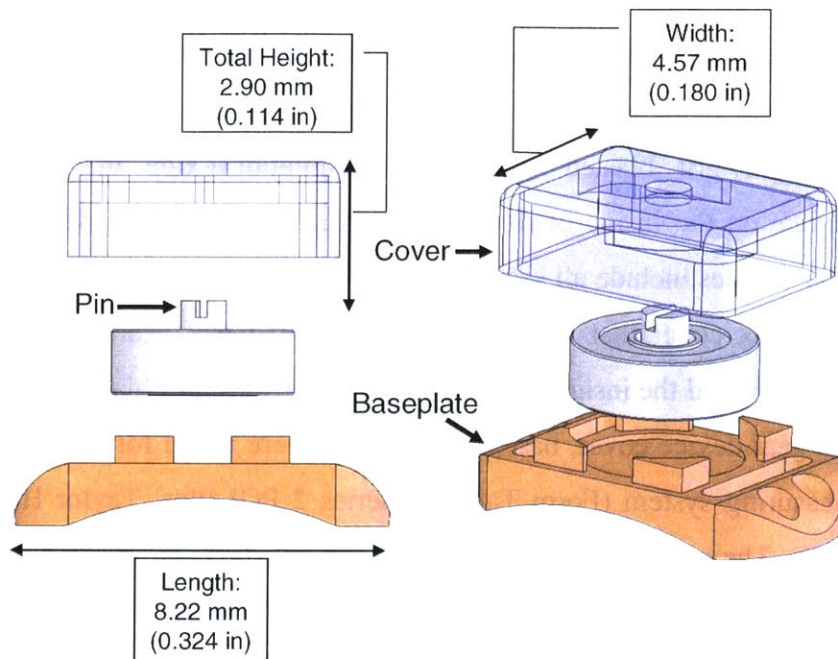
Dimensions of the ball bearing device, exploded view.
